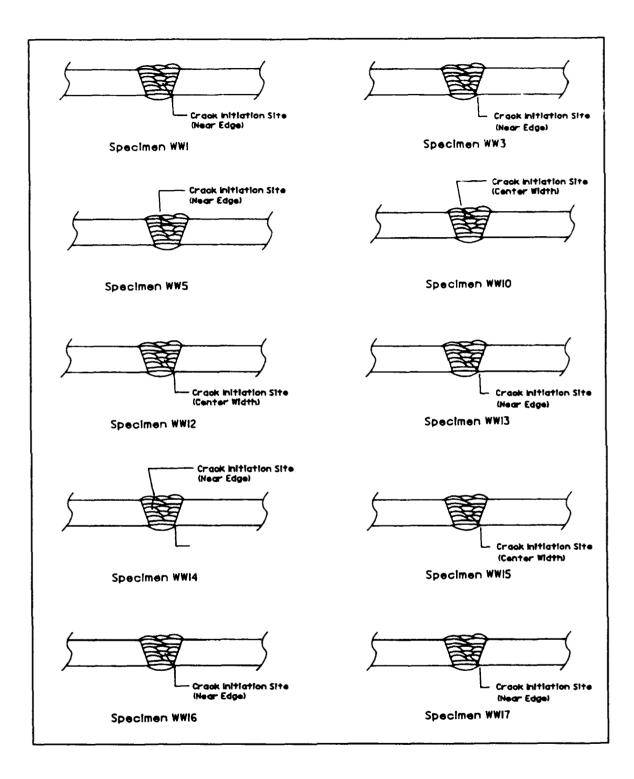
Failure Locations of Wet Weld Specimens (Without Backing Bars)
